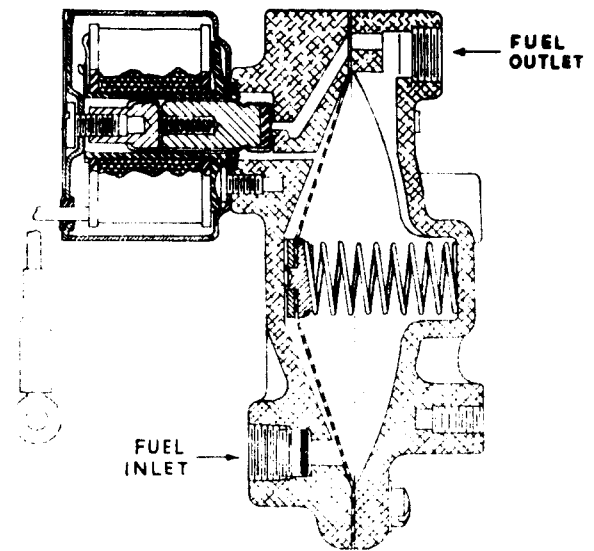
SECTIONAL VIEW OF FUEL SAFETY VALVE
